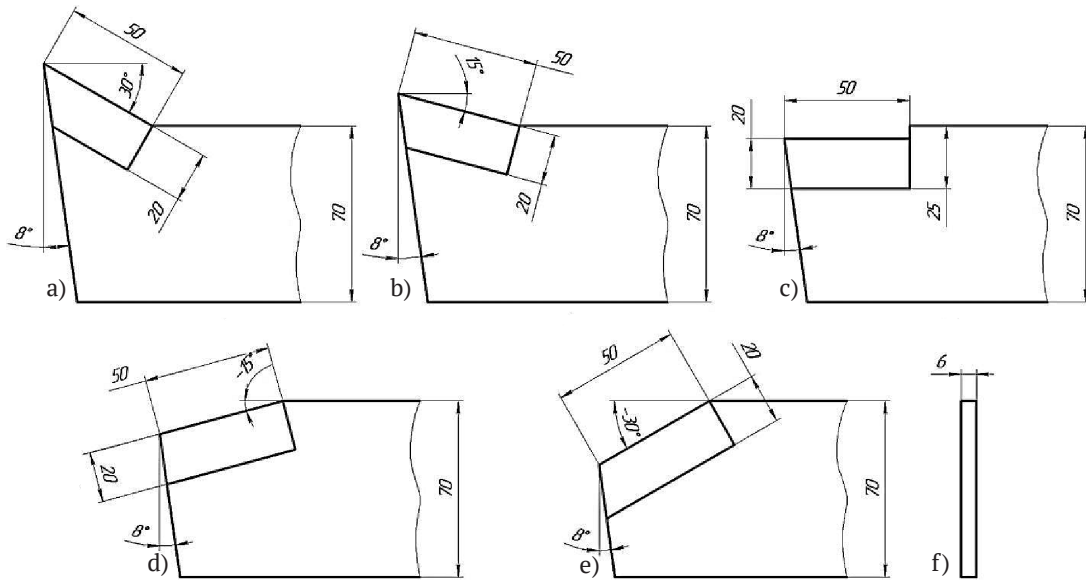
Geometric dimensions of models of cutting tools with the angle of installation of a carbide insert
